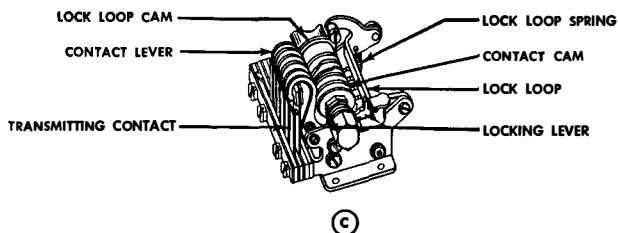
Transmitting cam cylinder, contact levers and springs.
